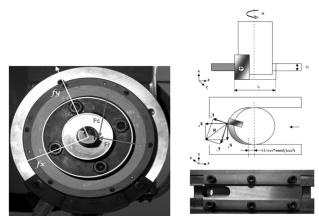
Reference system (F_x, F_y) fixed to the cutting tool in the rotating dynamometer and milling process under orthogonal cutting conditions
